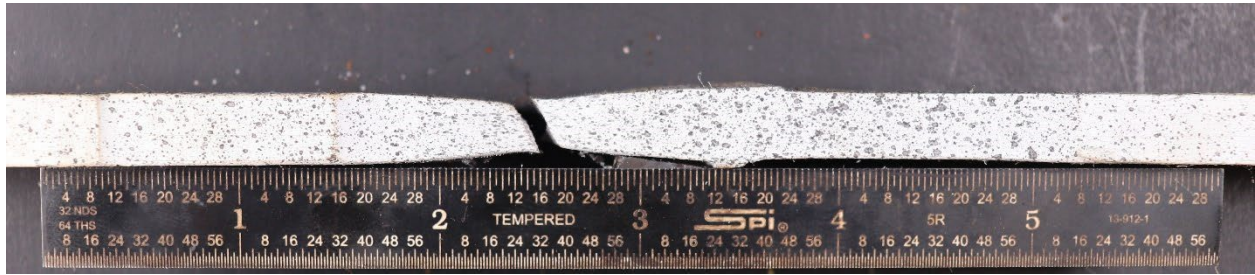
12:00 o'clock orientation cross girth weld tensile.
